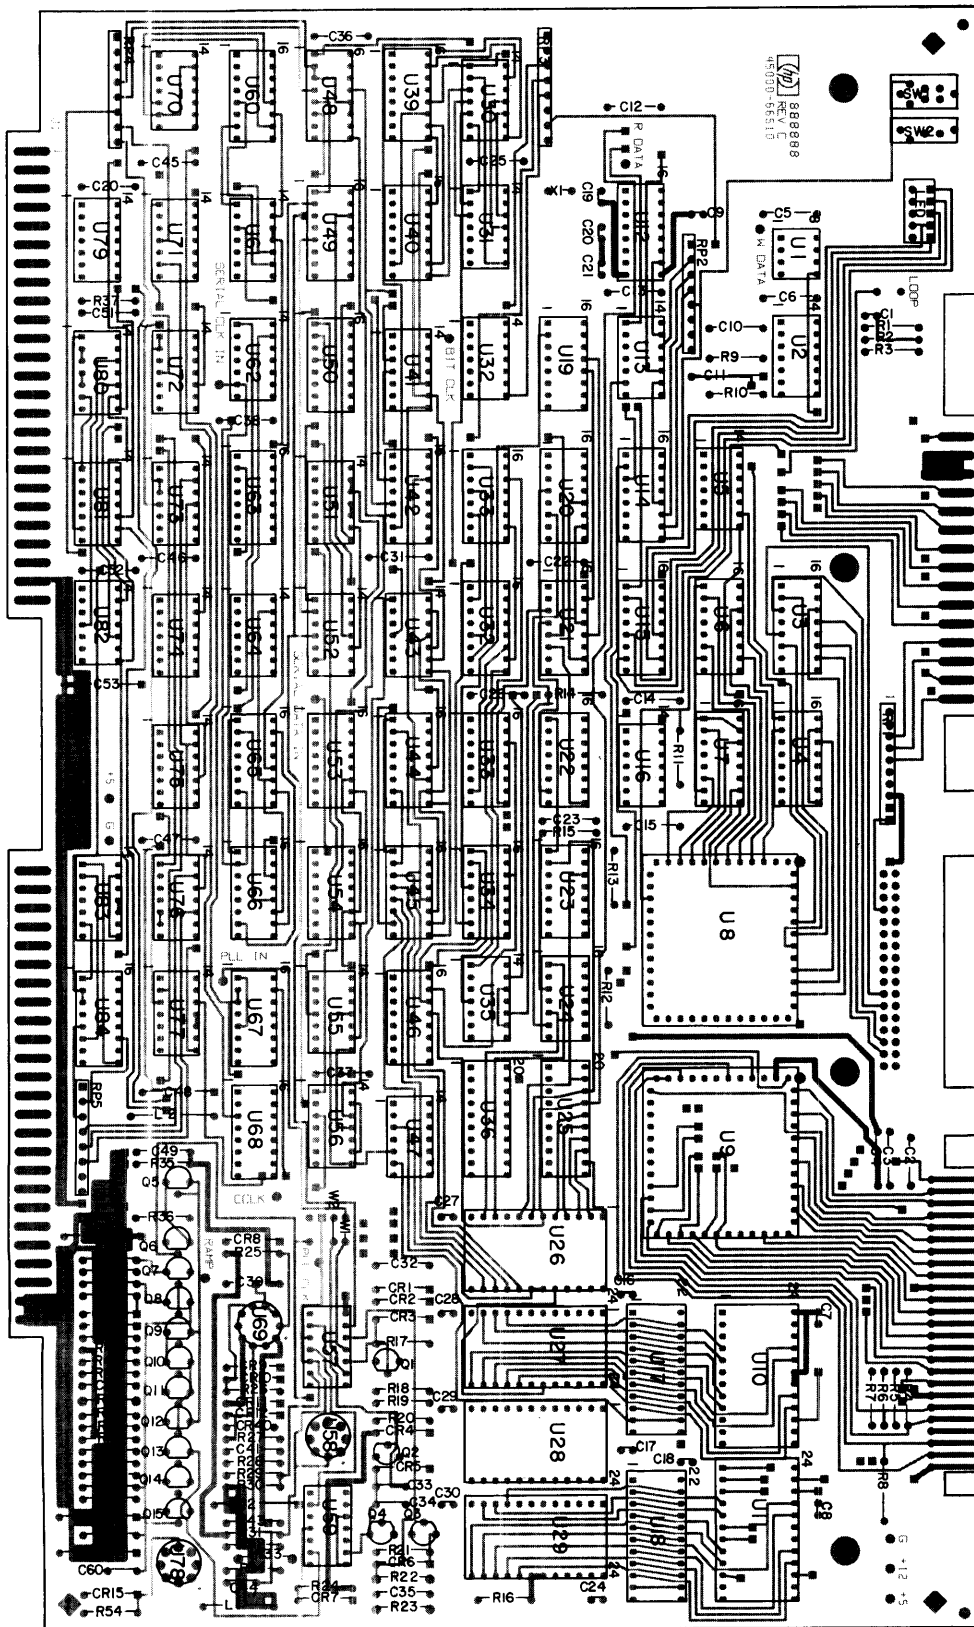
Controller Board A1 (45000-66510) Component Locator
